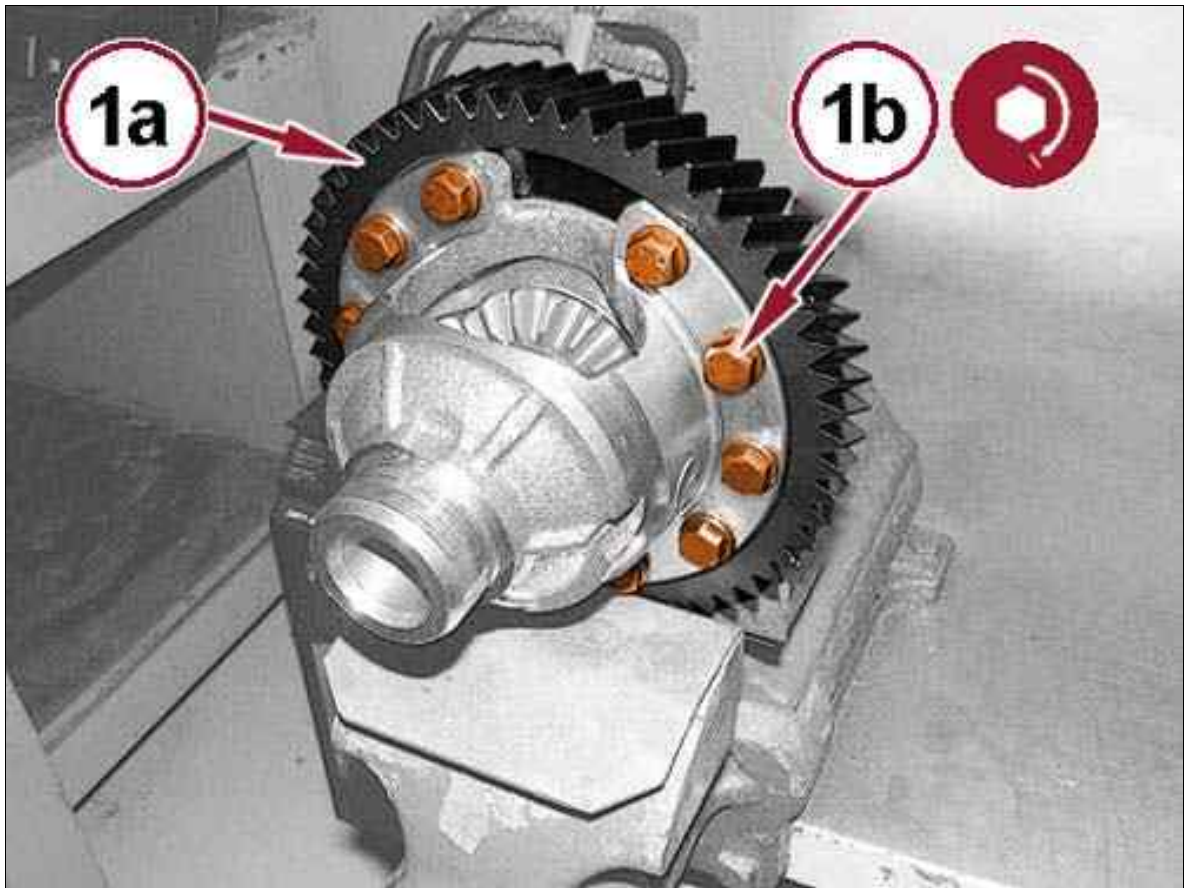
Break Through Wall Point, Satellite Carrier Pins, Planet Gears & Shims
